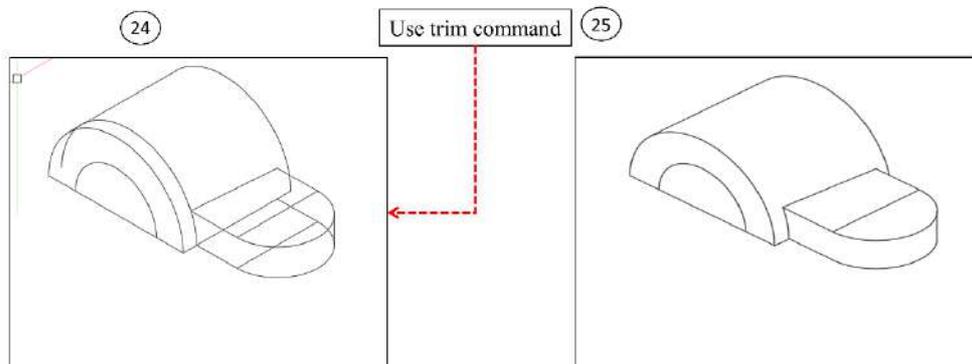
Example of an isometric drawing (Step 24 and 25)
